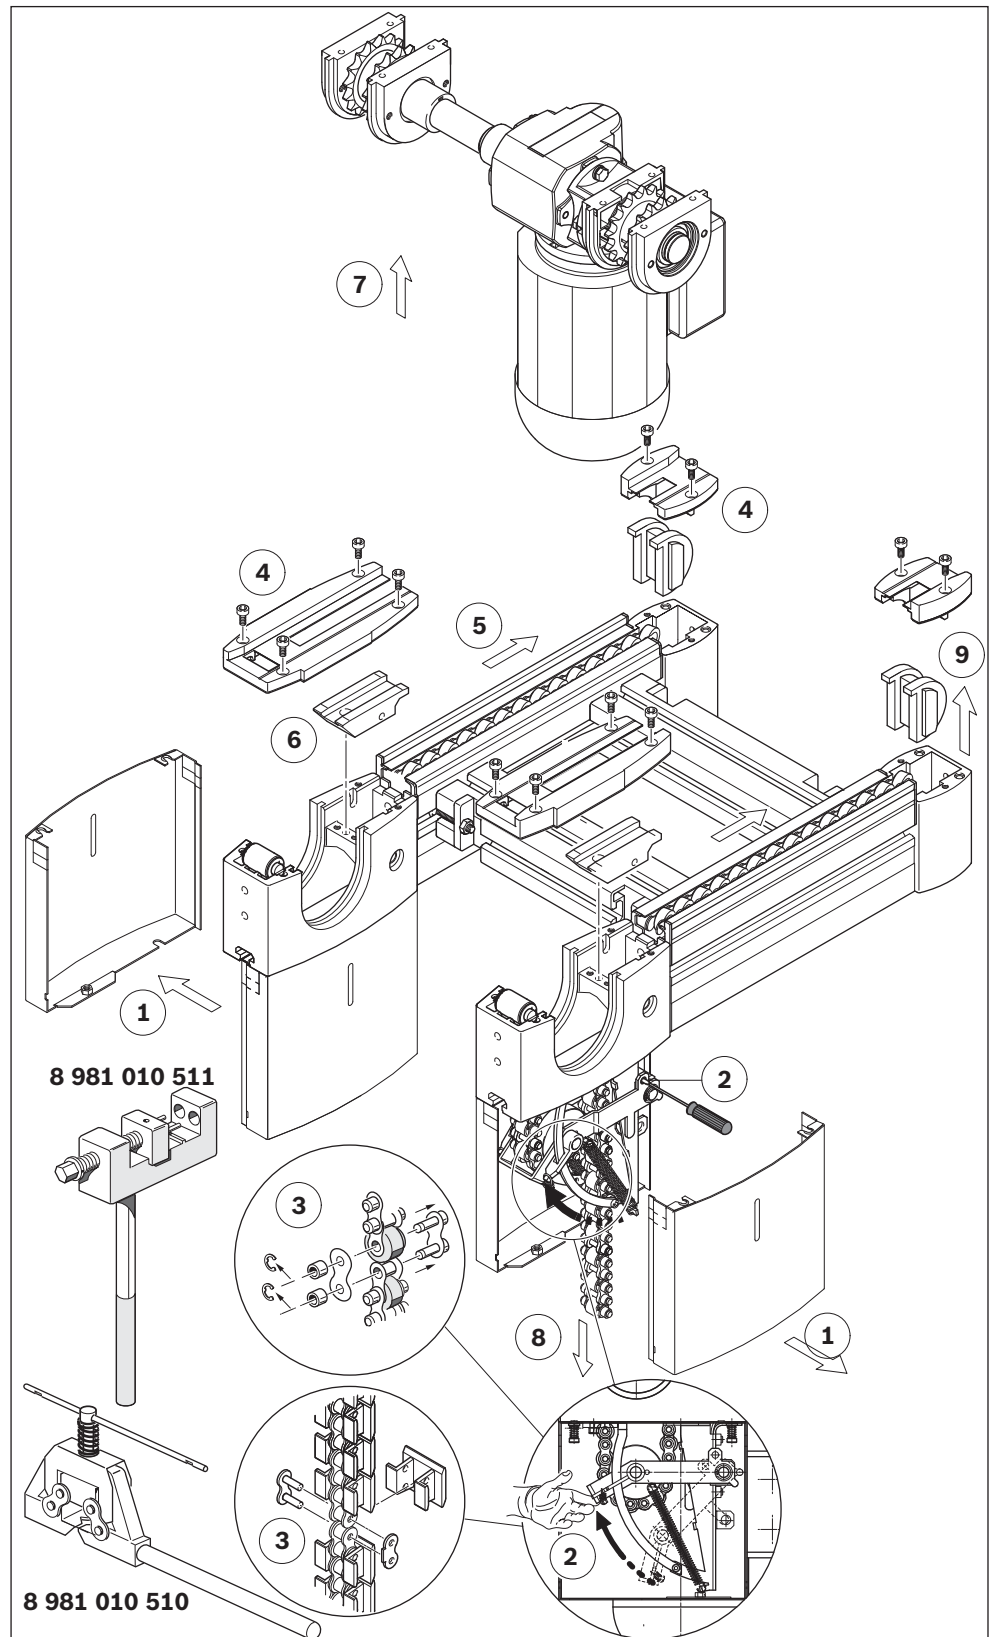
Exchanging the conveyor chain: BS 2/C-100, ...-250, BS 2/R-300, ...-700, MA = R/L (2/2)
